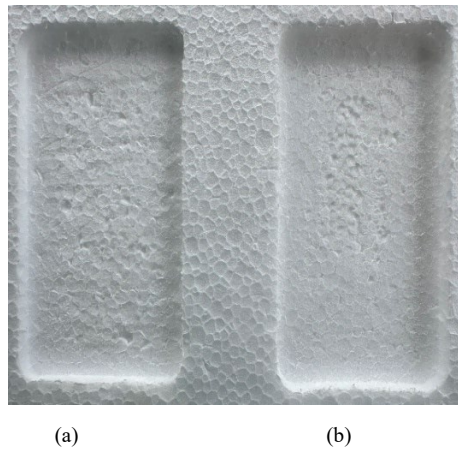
Machined workpiece using different toolpaths (a) equidistant: (b) parallel
